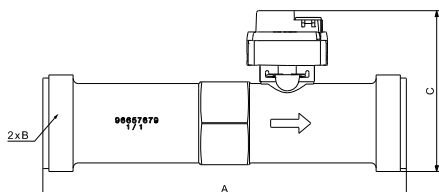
Dimensions, MFS 40-400 l/min, without adapter
